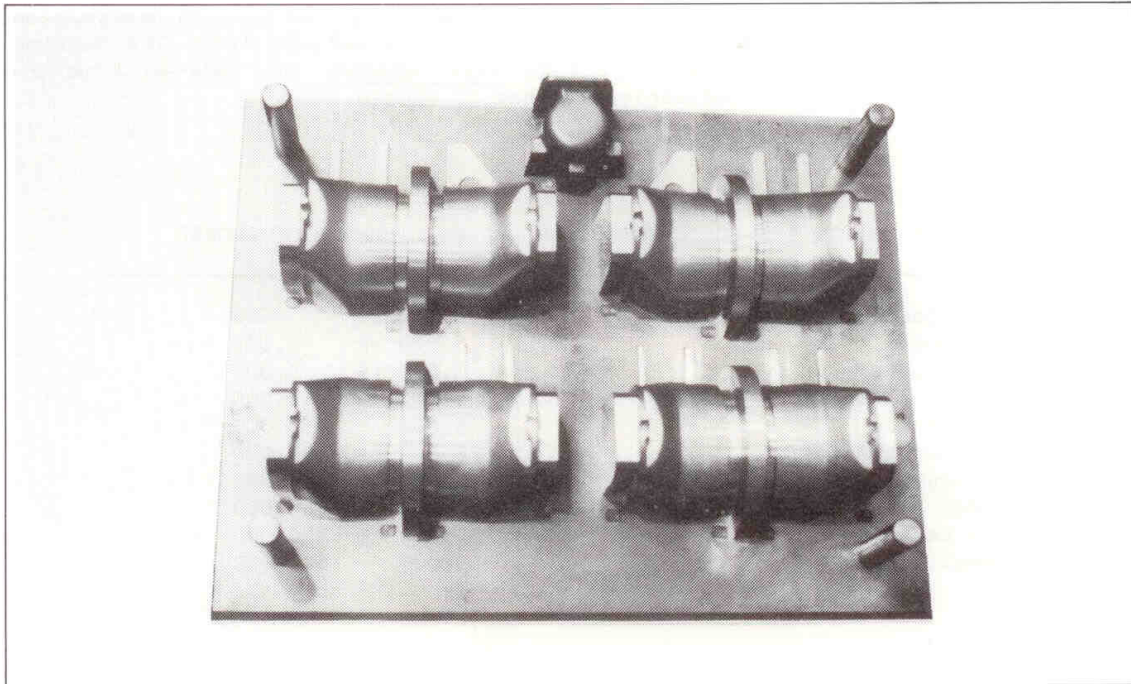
Standard gray iron pattern plate with fully machined brass patterns.
